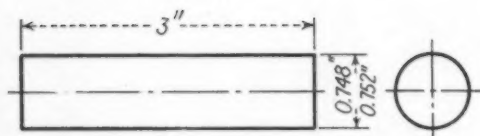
The inspection of high-carbon tool steel necessitates the use of a hardenability specimen such as shown here.
